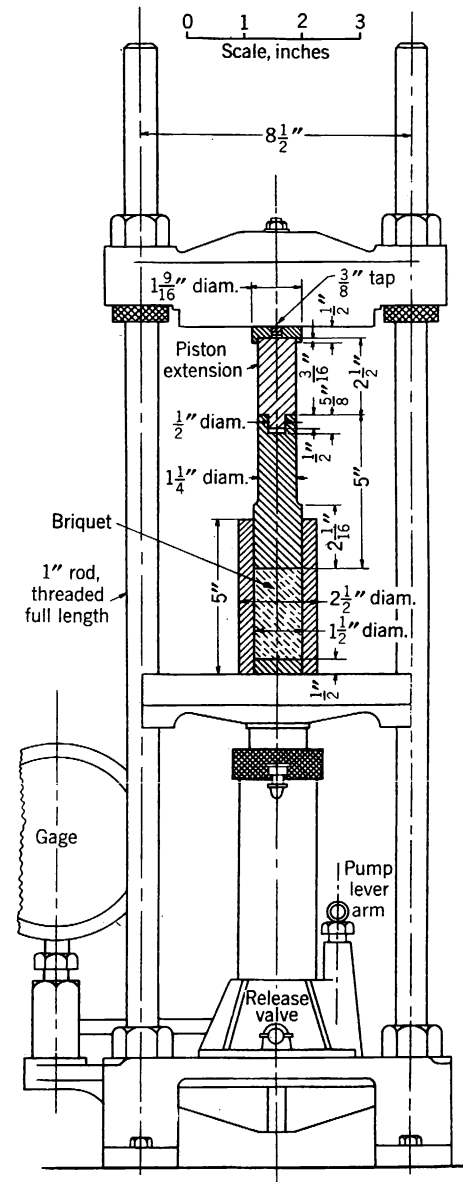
Hydraulic press with cylinder and piston for forming cylindrical briquets.
